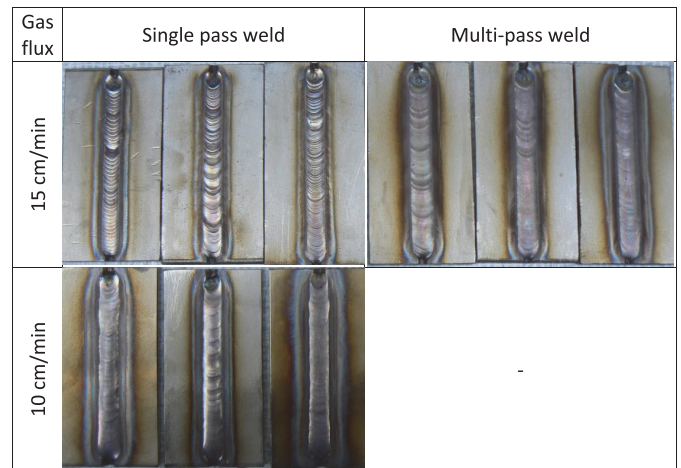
The TIG welded surface of stainless steel S82441 with single pass weld and multi-pass weld made with filler metal (3 samples for each variant) in the 100% Ar shielding with flux 10 and 15 cm/min in as welded condition
